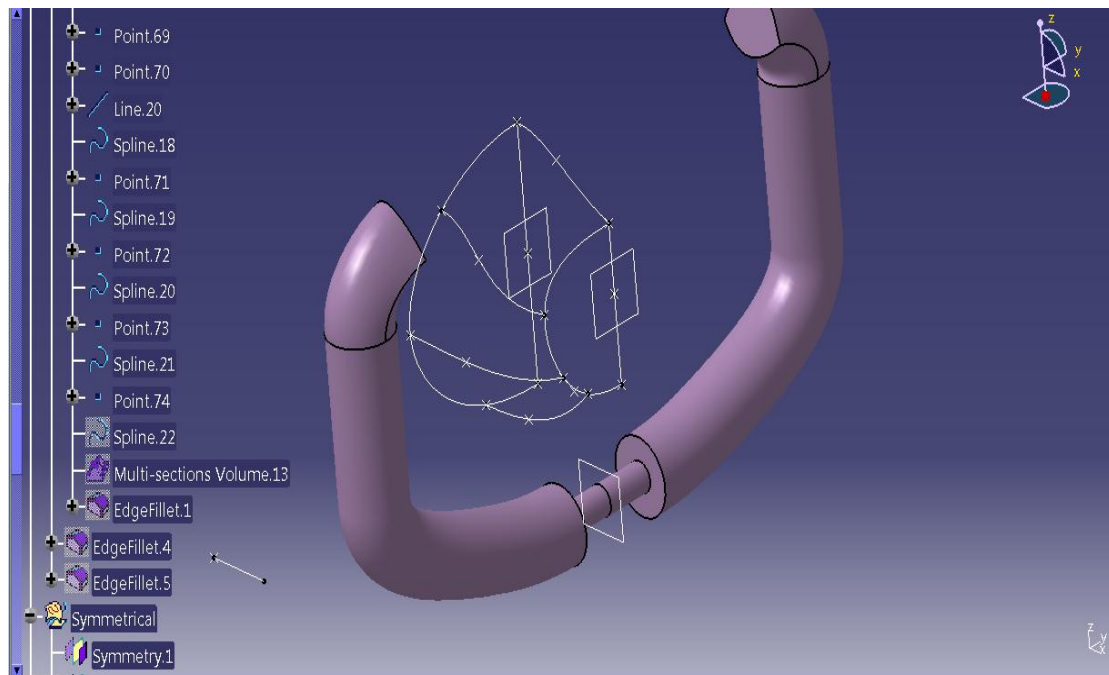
Driver's side air bag module 1st section wireframe.
